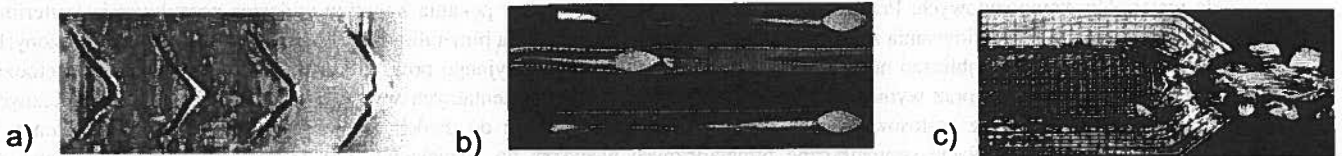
Fracture phenomena in extrusion process, a) internal fracture of monomaterial, b) fracture of the core of composite, c) fracture of the sleeve
